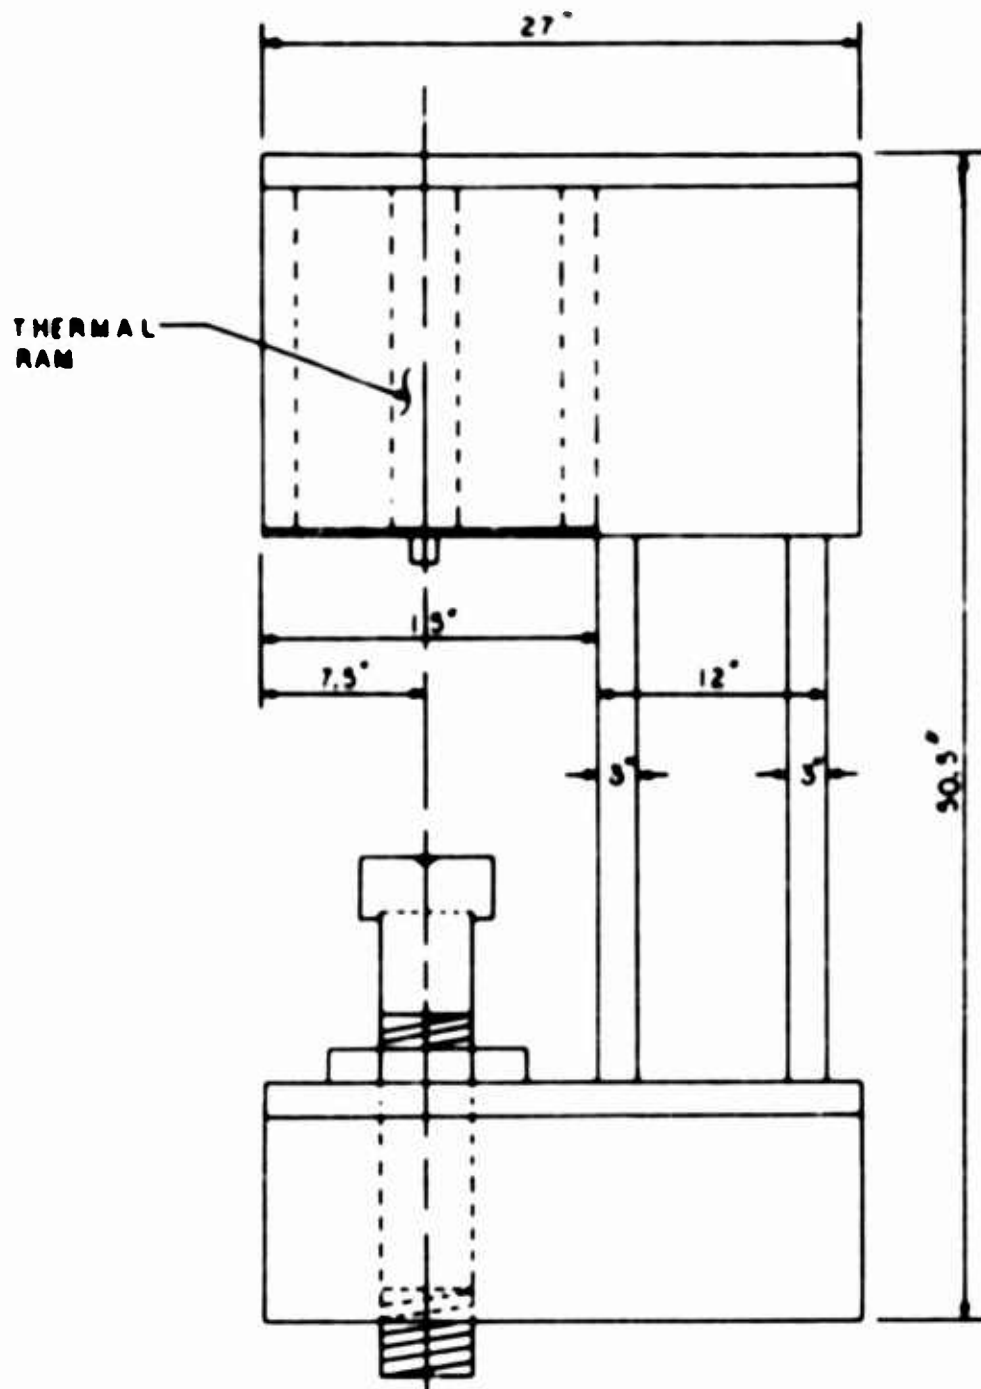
Side View of the Testing Machine Showing the Location of the Thermal Ram.
